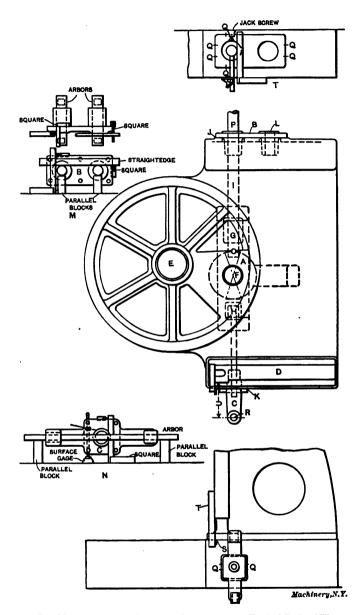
Laying-out and Aligning Operations on a Vertical Boring Mill of the Spur Gear Driven Type. By the Method shown, no Special Gages or Tools are required
